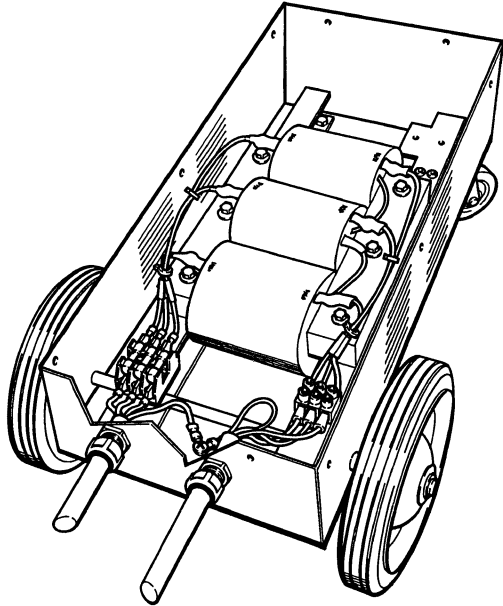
Wheels and Casters Installed on 600V Transformer Case
